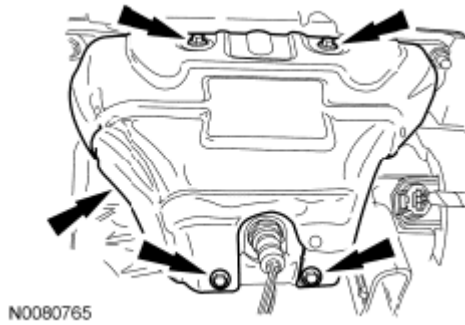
Locating Exhaust Manifold Heat Shield Bolts & Heat Shield
